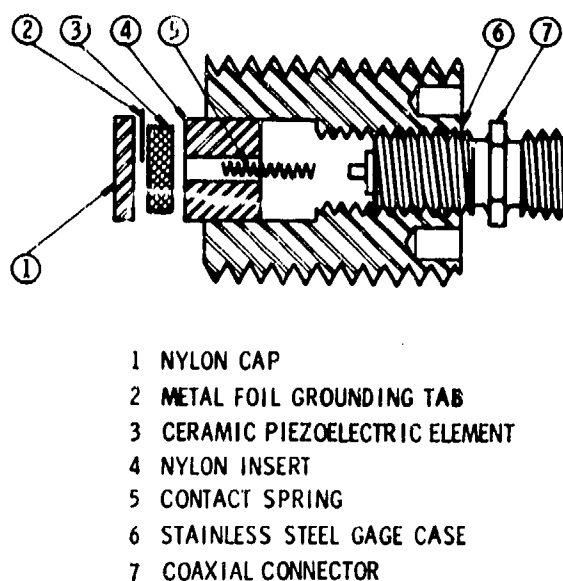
Exploded View of Half-inch Gage of Granath and Coulter⁶
